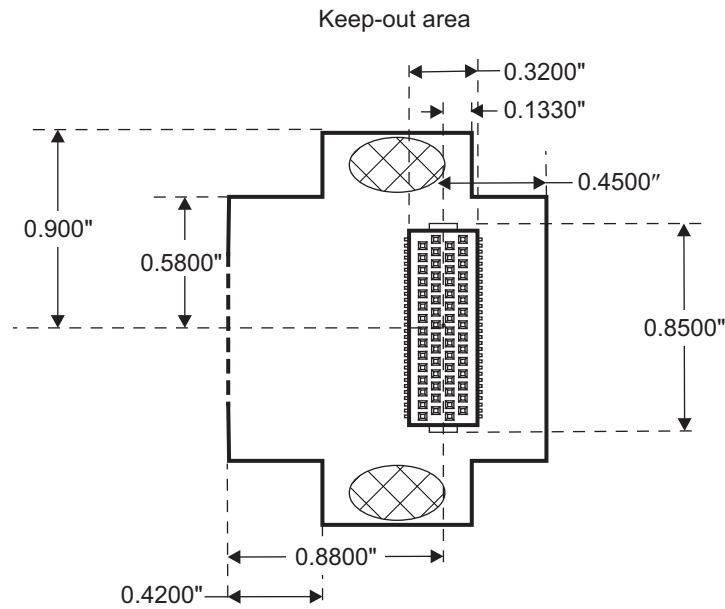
XDS560T TI 60-Pin Target Cable Board Keep-Out Area
